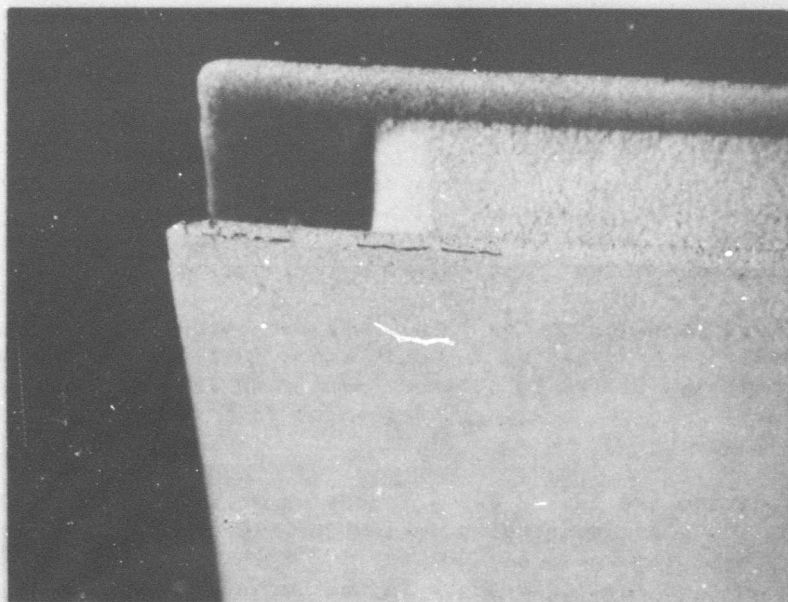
CLOSE-UP OF COATED PANEL CORNER SHOWING
